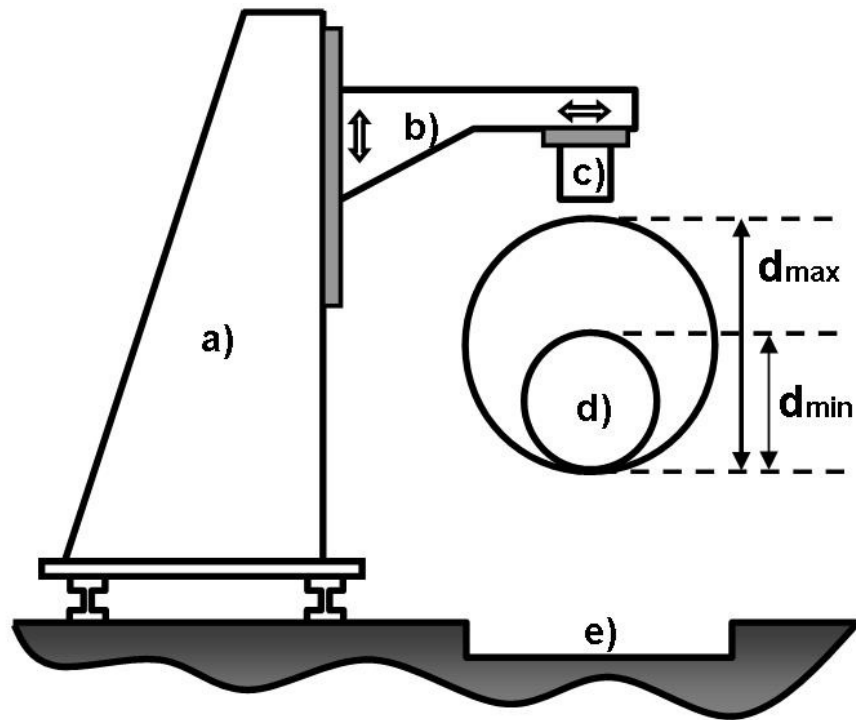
Testing mechanics for spiral pipe inspection. a) Machine frame (stand), b) cantilever beam (horizontal boom) with vertical position adjustment, c) probe holders with horizontal position adjustment, d) spiral SAW-pipe, and e) foundation with water drainage (closed water circuit).
